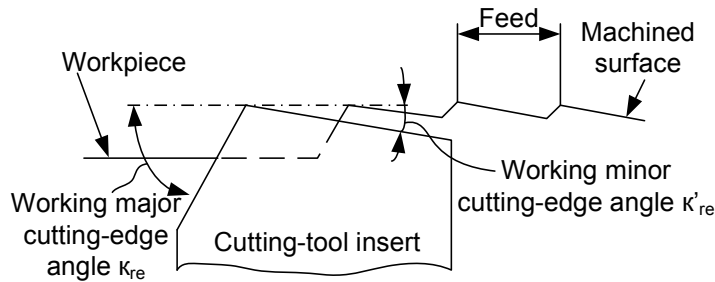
Surface roughness produced by a single-point cutting-tool geometry with a sharp corner.
